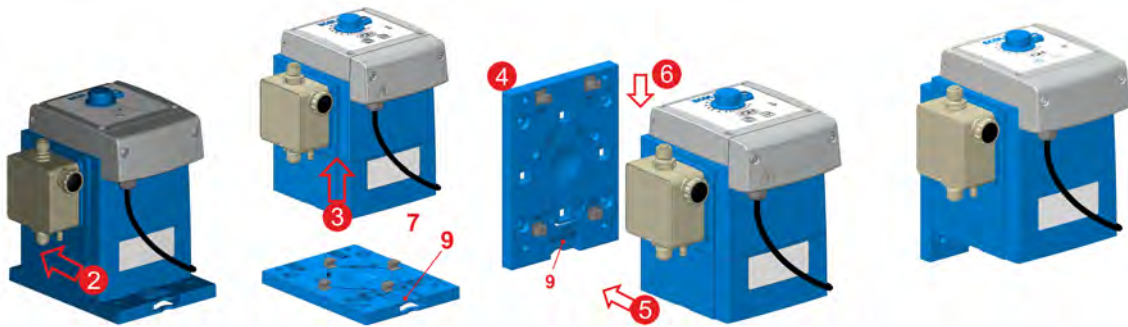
Changing from countertop-mounted (upright) to wall-mounted (suspended)
